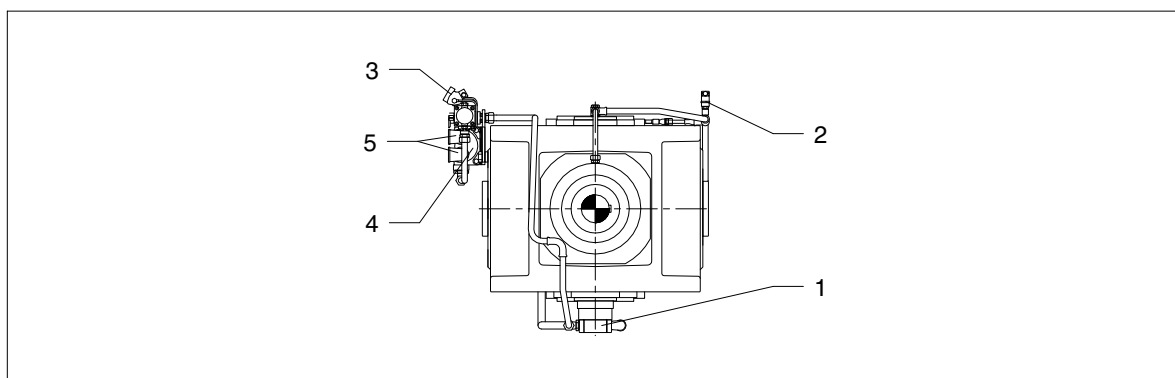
Add-on oil-supply system with water oil-cooler on gear units type B..V
